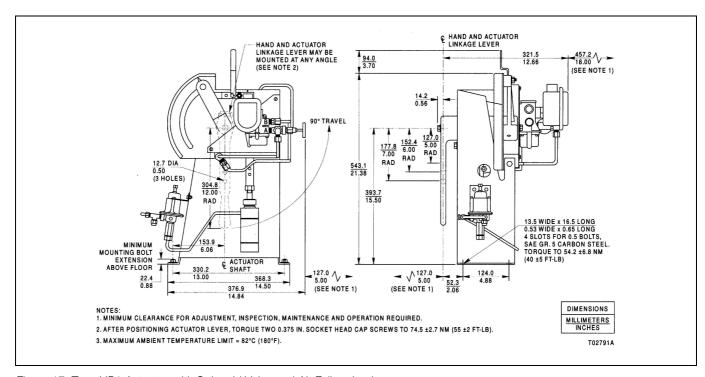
Type UP1 Actuator with Solenoid Valve and Air Failure Lock
